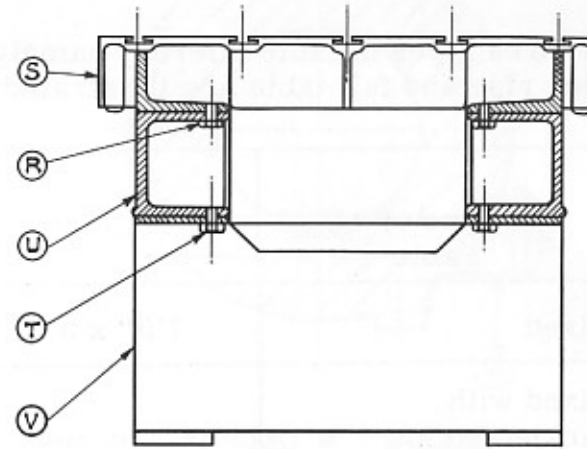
SECTION THROUGH FIXED TABLE WITH PACKING STRIPS.
